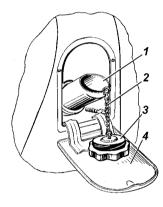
Fuel Tank Filler Neck: 1 -extending pipe; 2 -chain; 3 -fuel tank filler cap; 4 -access door
